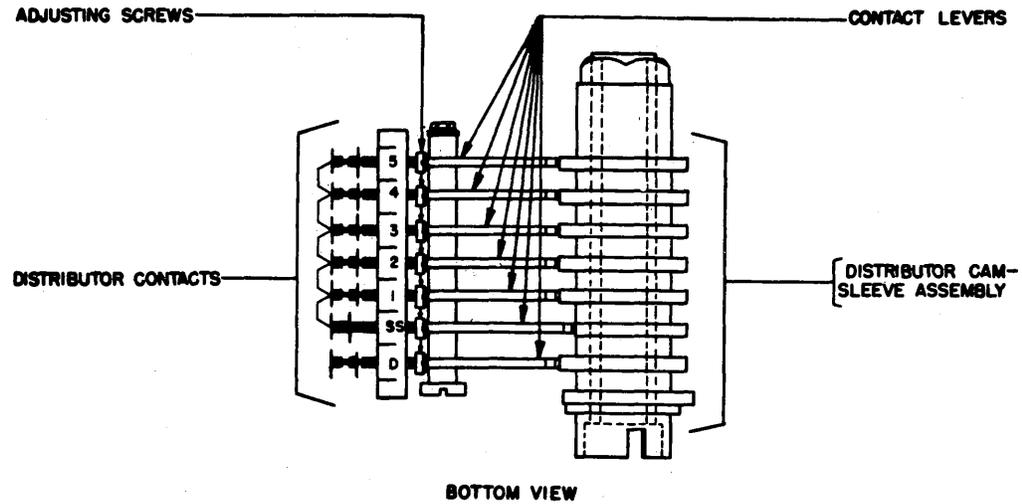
Distributor Contact Assembly - Reperforator-Transmitter
